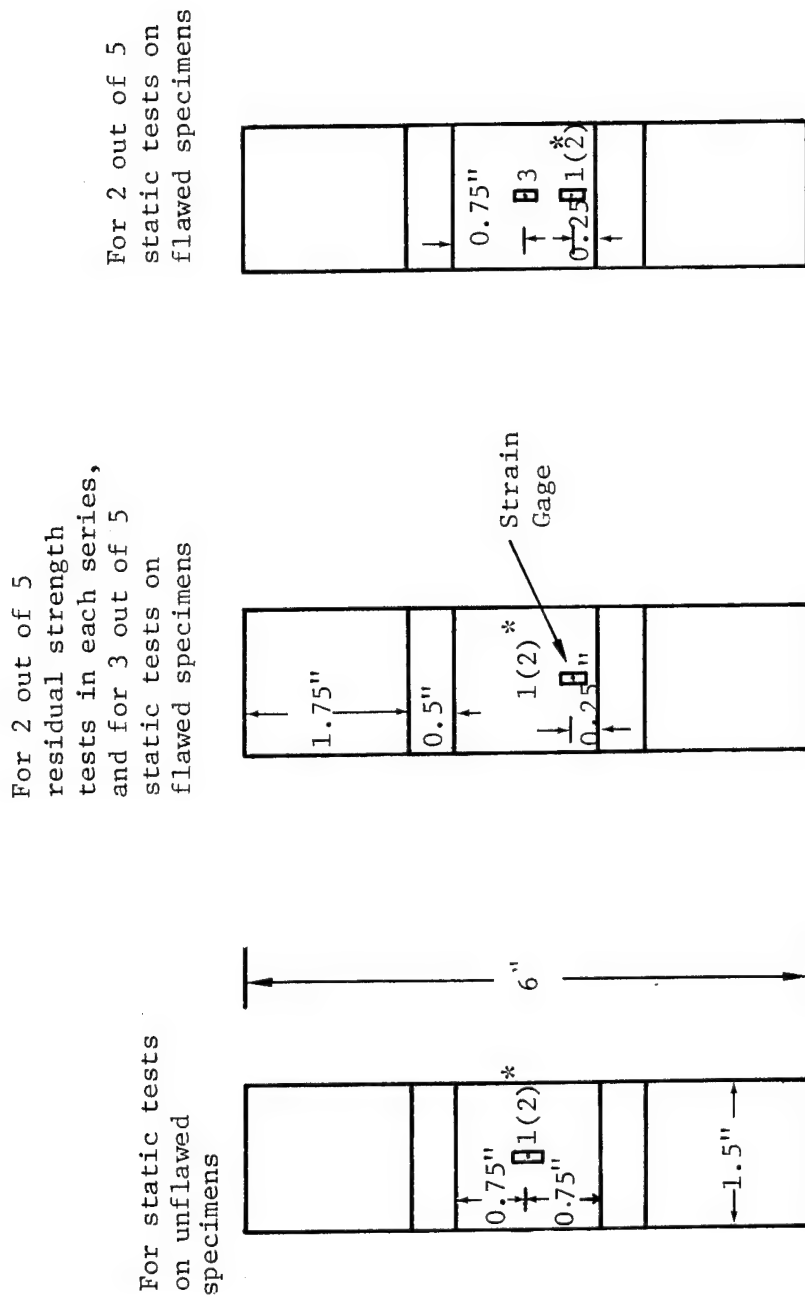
Test Specimen Geometry, Flaw Size and Location, and Tab Details
